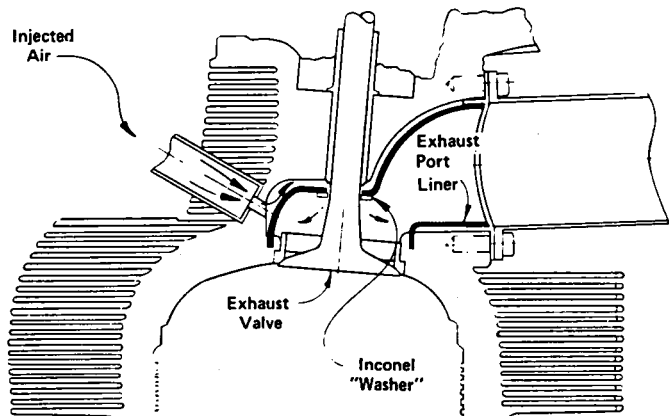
B - Cross sectional view of IO-520 cylinder head with exhaust port liner valve stem cooling design.
